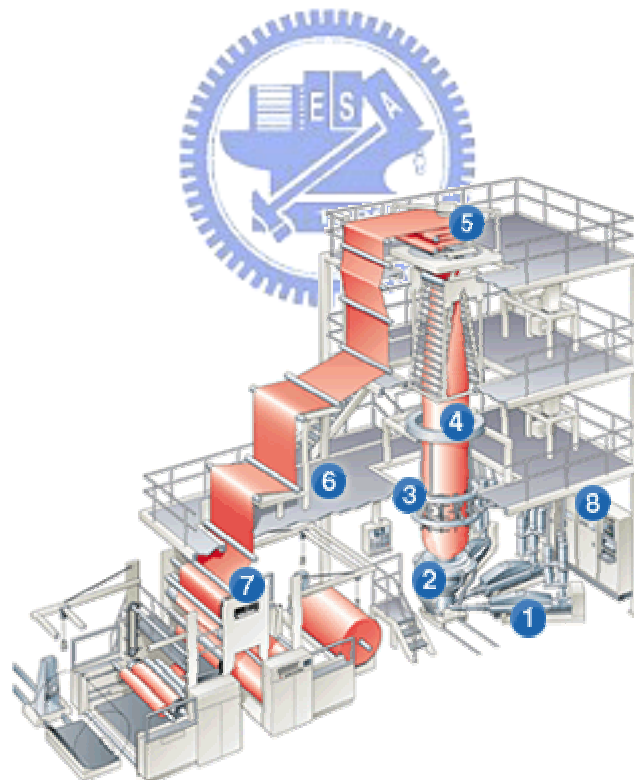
Coextrusion blown film line. (1) Extruders; (2) die and cooling equipment; (3) sizing unit; (4) thickness gauge; (5) take-off unit; (6) film edge control; (7) winder.
